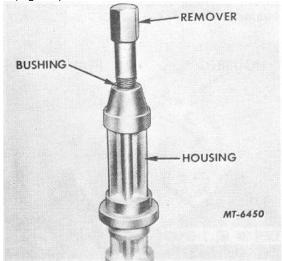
Bushing Remover SE-1955-5 Installed in Lower Bushing
